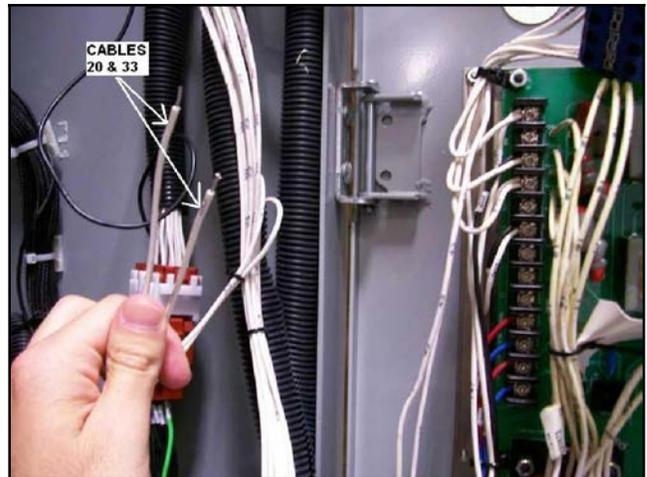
Connect Conversion Kit Wire Harness GM69403 to Plug P8
